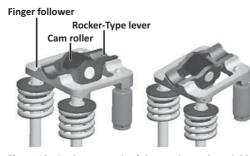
Rocker arm unit of the continuously variable cam shifting valve train
